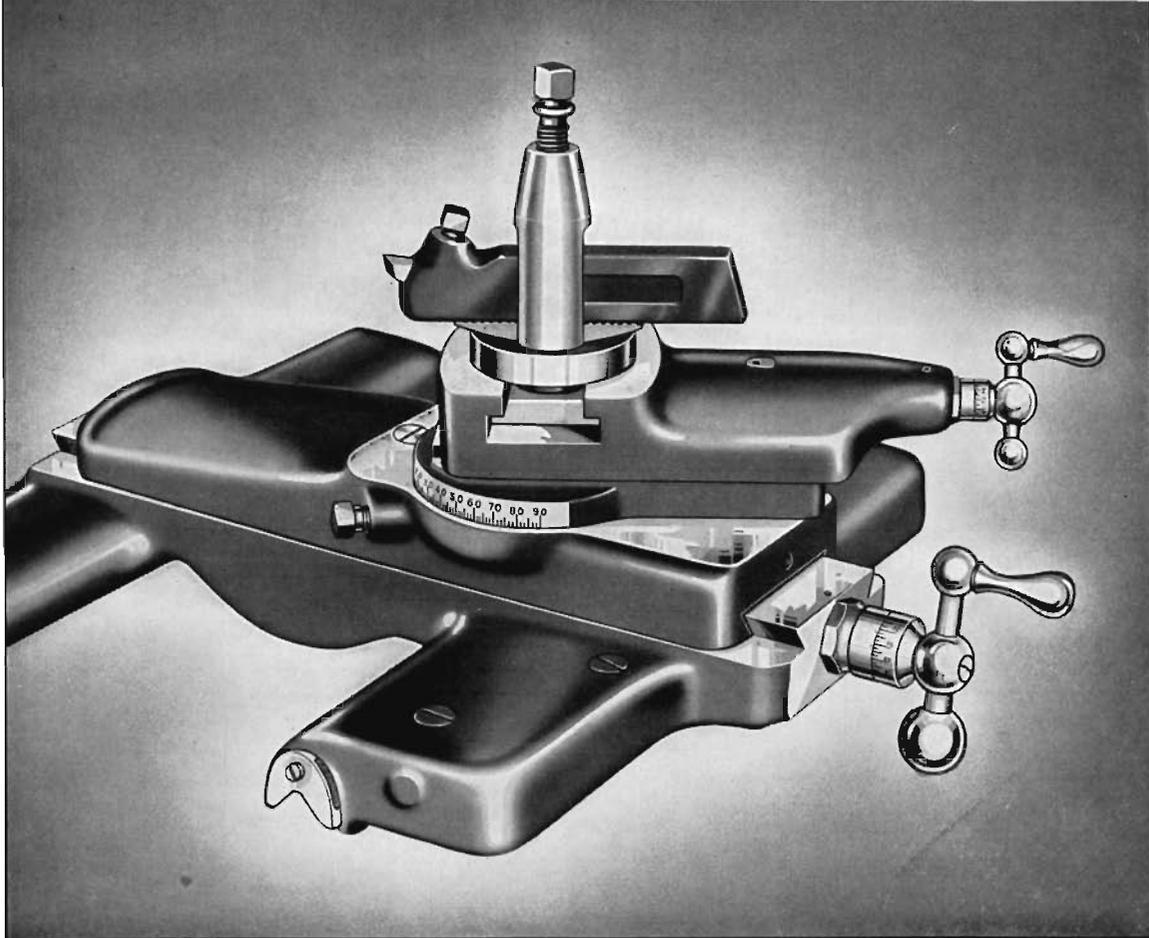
Improved Saddle and Compound Rest used on Series "R" 13-inch South Bend Lathes.
